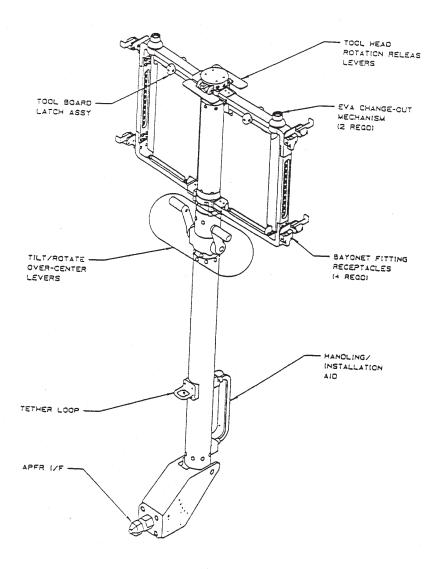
PORTABLE FOOT RESTRAINT WORKSTATION STANCHION (PFRWS)
